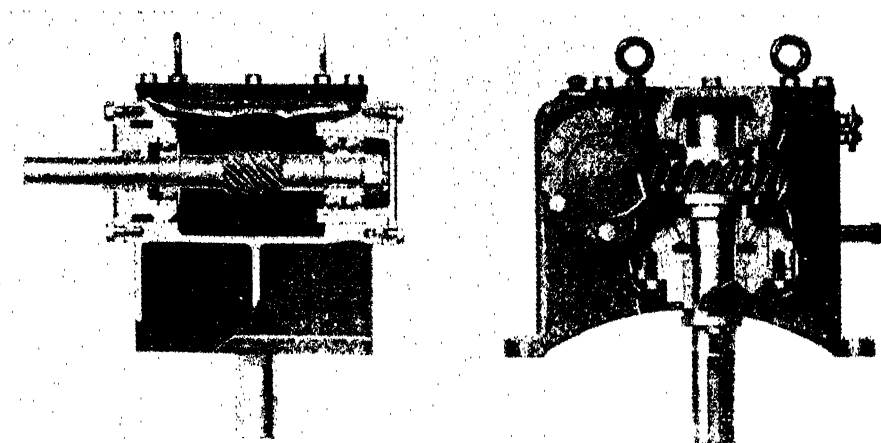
Vertical Worm Reducer. *Courtesy Cleveland Worm and Gear Co.
